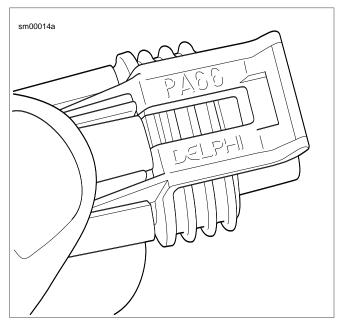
Delphi GT 150 Sealed Connector: Socket Housing Latch
